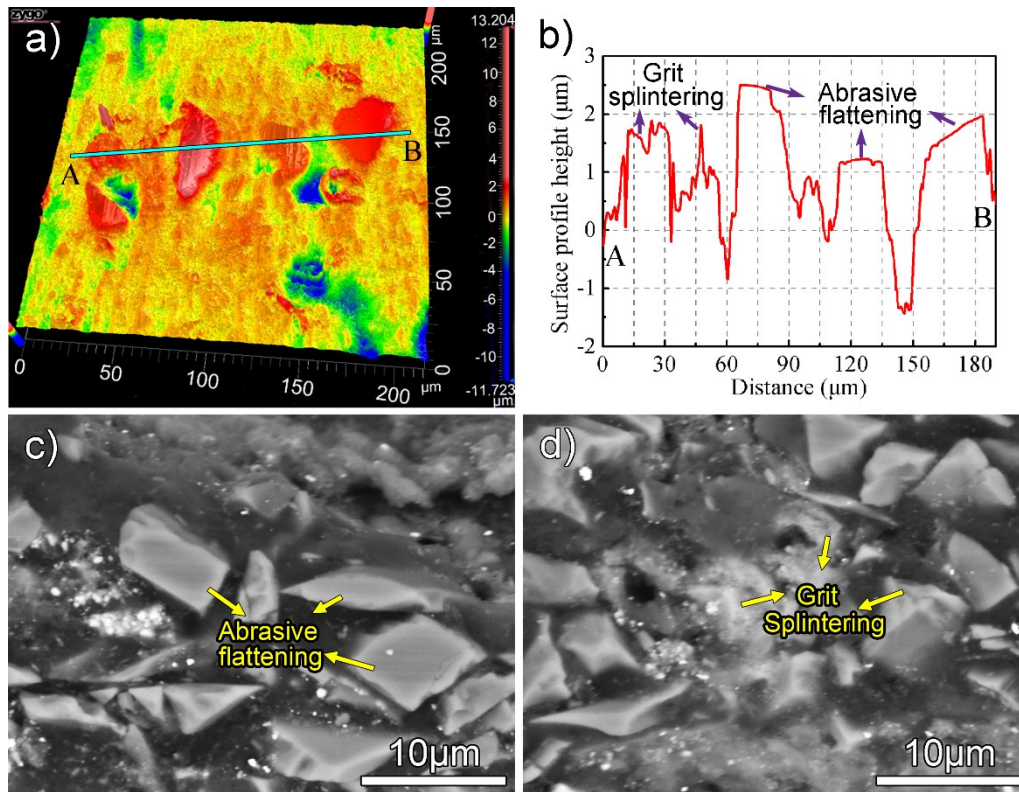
(a) Surface topography of the worn wheel, (b) cross sectional profile of the worn wheel, (c) and (d) surface morphology of the diamond wheel after grinding at 3 mm/min
